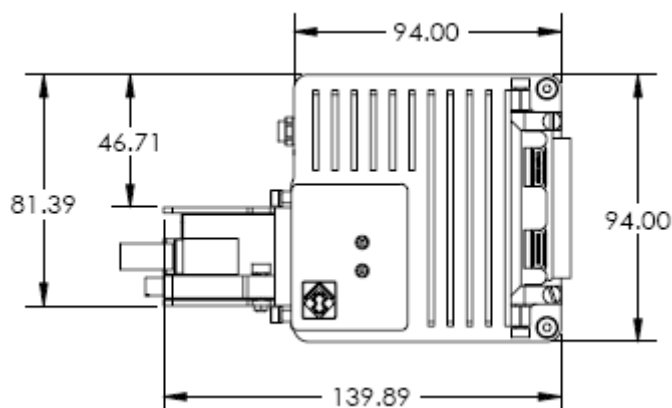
HG-CH Interface Unit dimensions and mounting holes, front (in mm)
